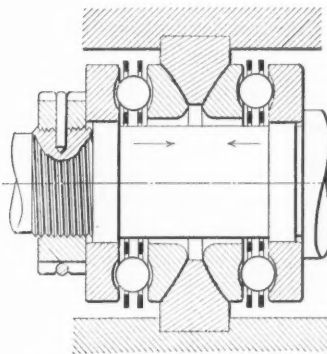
Thrust Load in Two Directions on Two Collar Bearings.
